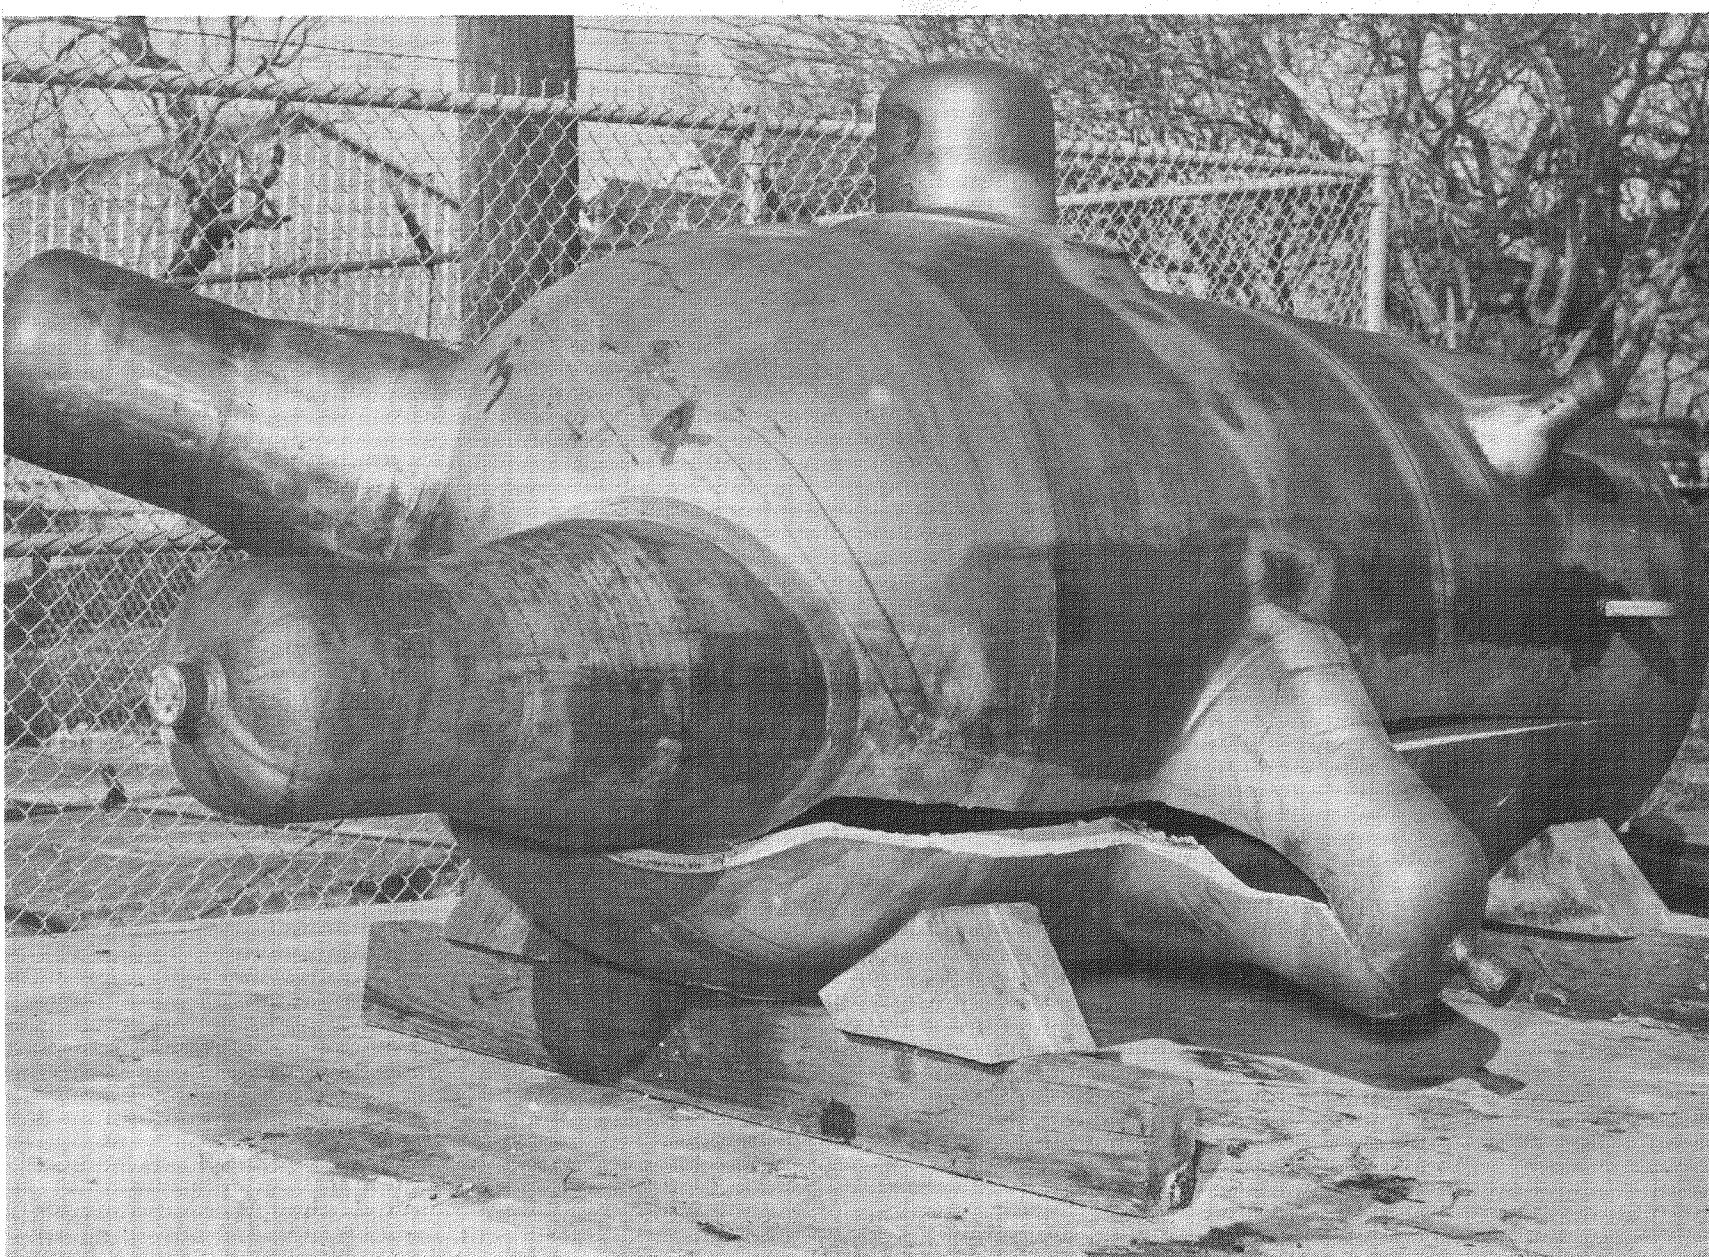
Fracture Through Nozzle No. 6 of the No. 1 A-201 Vessel
